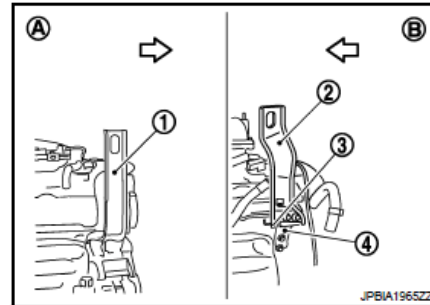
Identifying Engine Slingers Into Front Of Cylinder Head (Bank 1) And Rear Of Cylinder Head (Bank 2)
